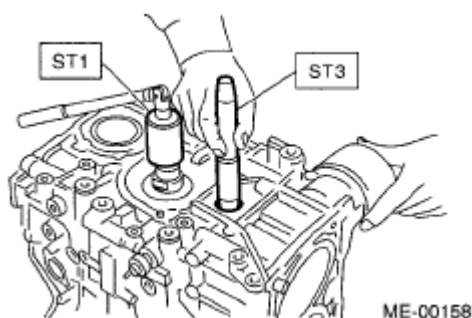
Aligning Piston Pin Hole With Connecting Rod Small End
